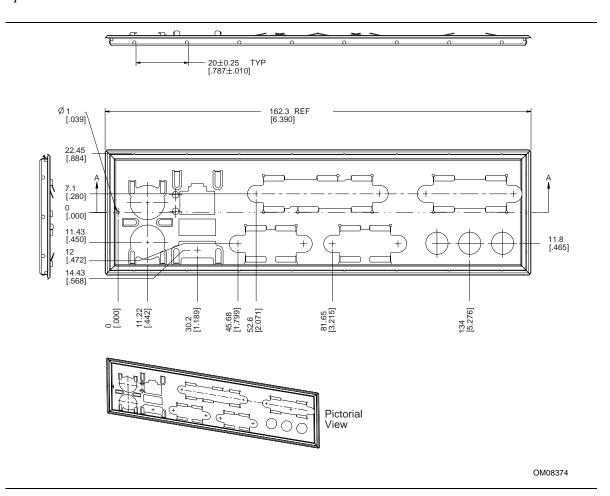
Back Panel I/O Shield Dimensions (microATX Chassis - Independent)
